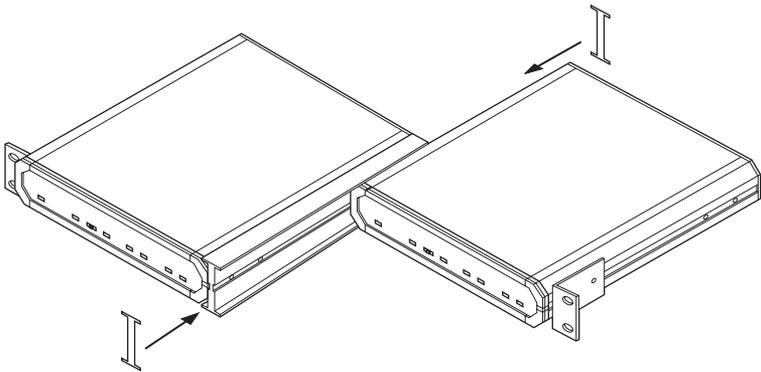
Finishing the rackmount assembly for a pair of FOLDS.
